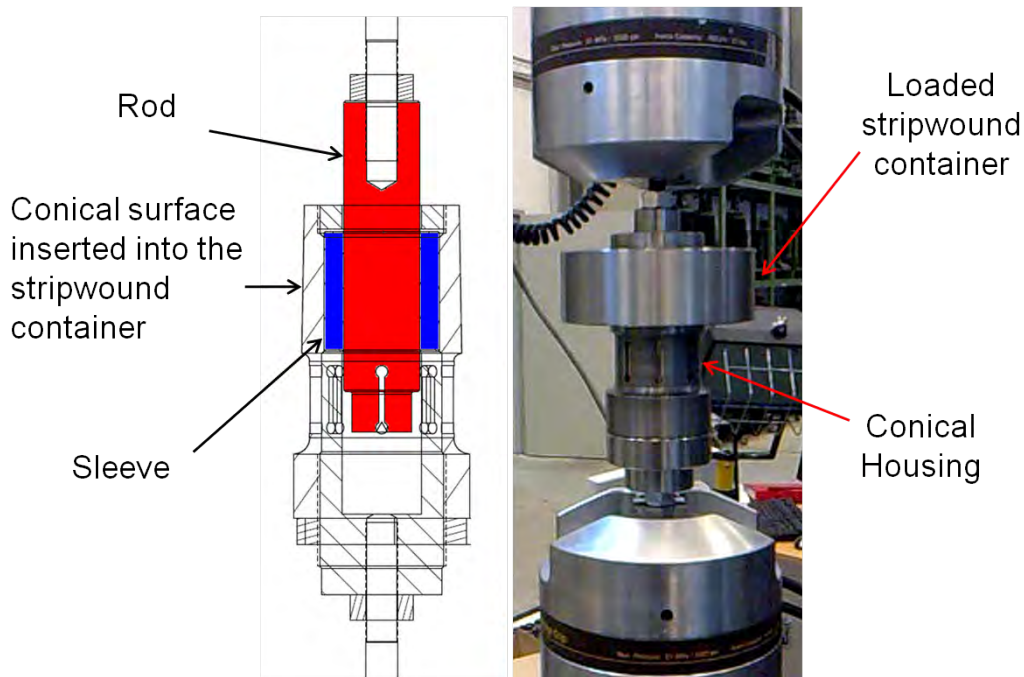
Axial section of the assembled AST rig without stripwound container (left); the apparatus mounted in a tensile machine (right).
